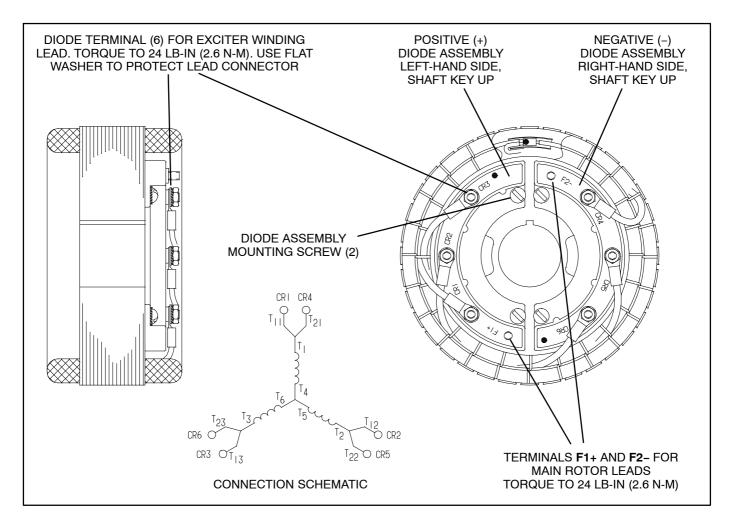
ROTATING RECTIFIER ASSEMBLY
